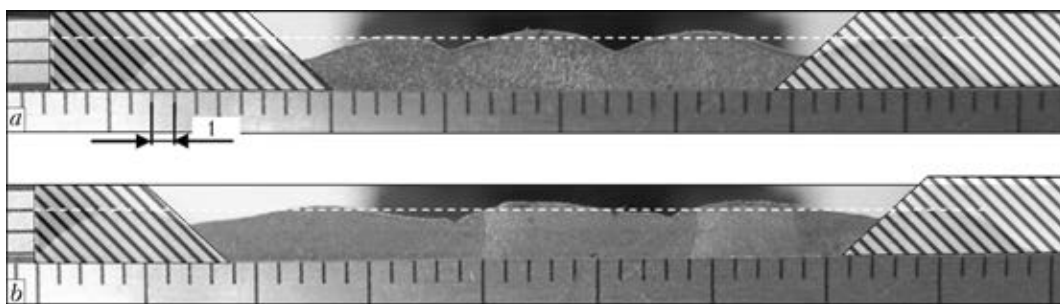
Macrosections of deposited layer using multipass MIG/MAG welding (hatched regions simulate section view of cut-out area): *a* – layer initial section (A–A section in Figure 6); *b* – layer end section (B–B section in Figure 6)
